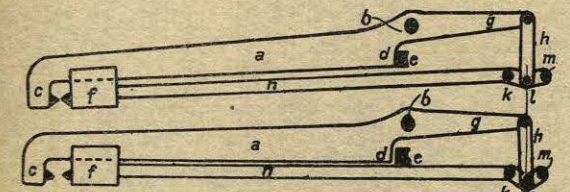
Gripper of Wellman-Seaver Charging Machine.
